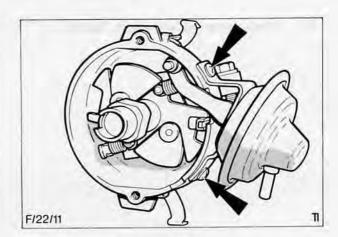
Vacuum unit securing screws (Motorcraft distributor)
